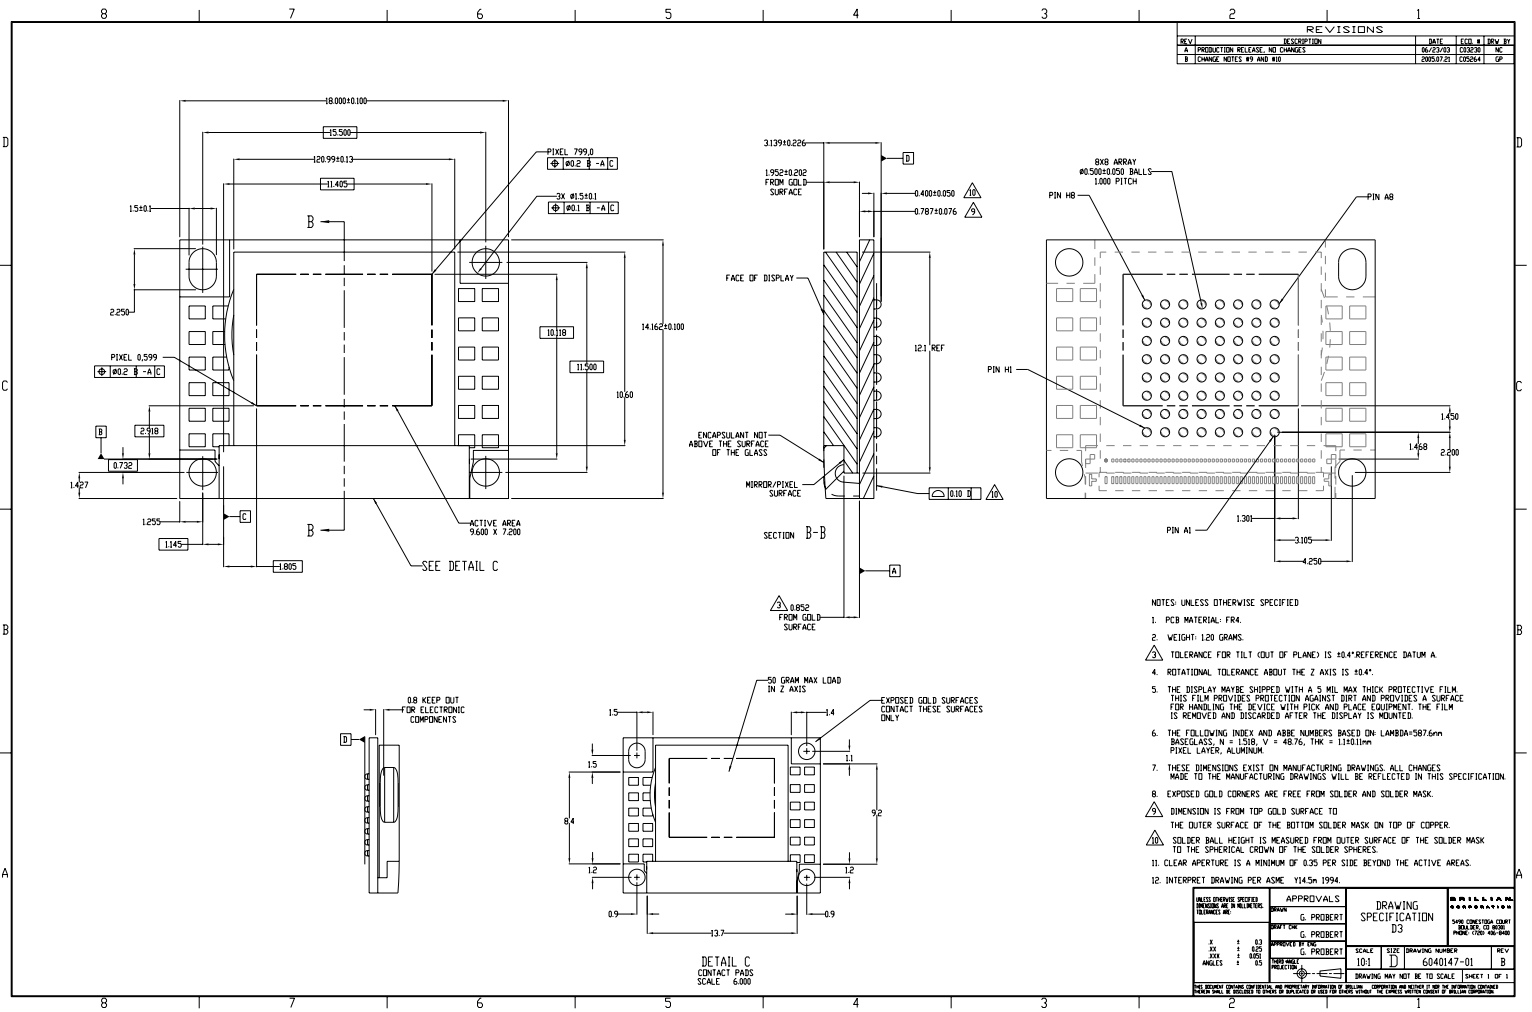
Z86D-3/Z86D-3C Mechanical Dimensions
